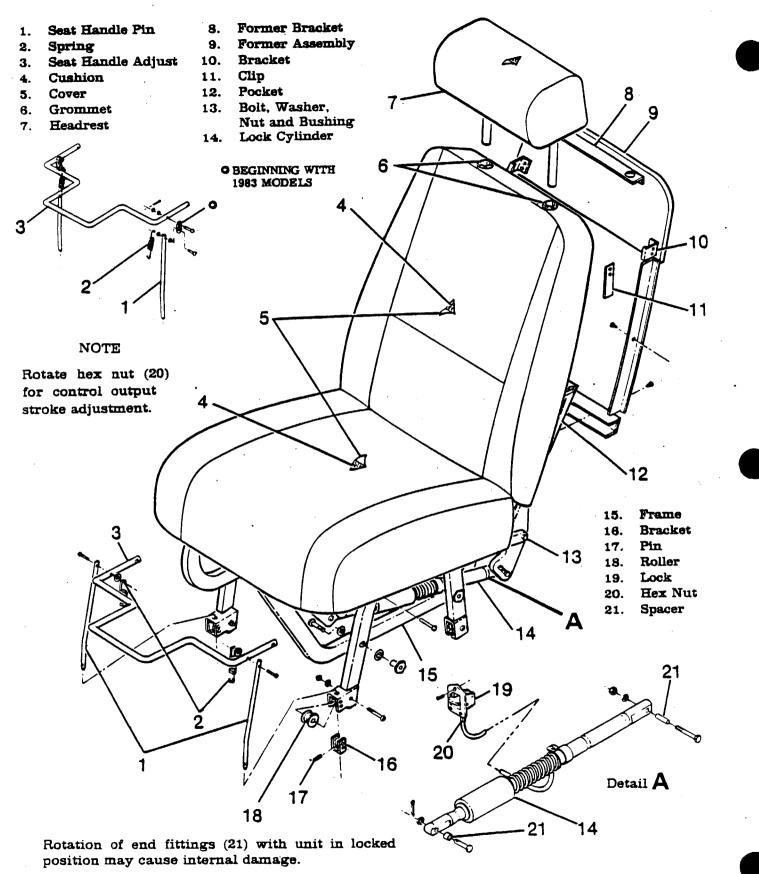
Pilot and Copilot Seat Assembly-Standard
